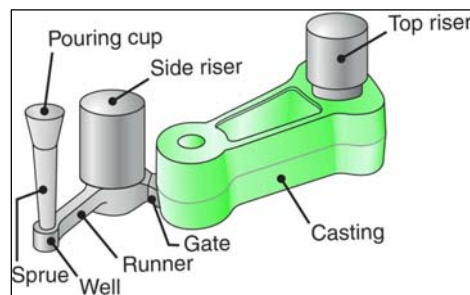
Schematic illustration of a typical riser-gated casting. Risers serve as reservoirs, supplying molten metal to the casting as it shrinks during solidification.
